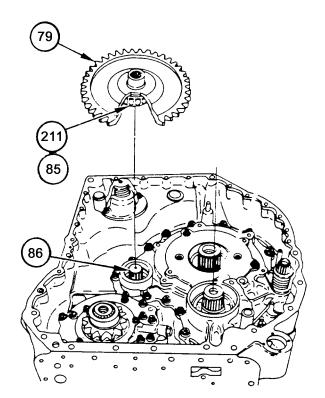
Steer Shaft Drive and Range Output Drive Gears.
